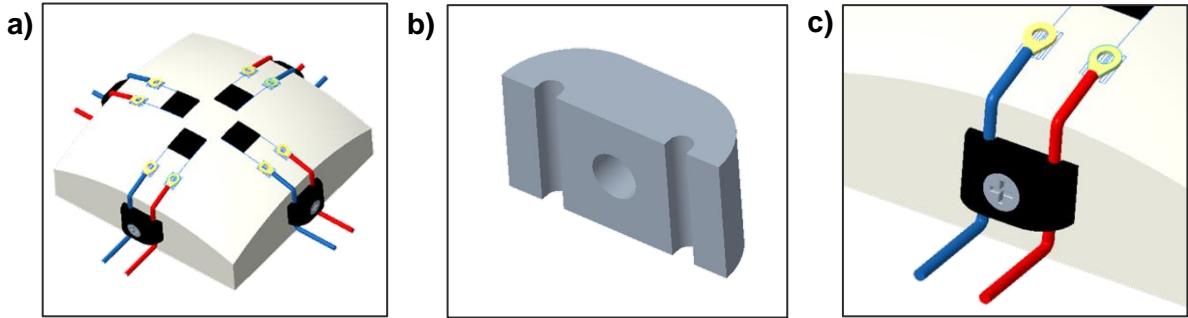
a) Coupling readout hardware; b) CAD pull relief; c) Pull relief in assembly
